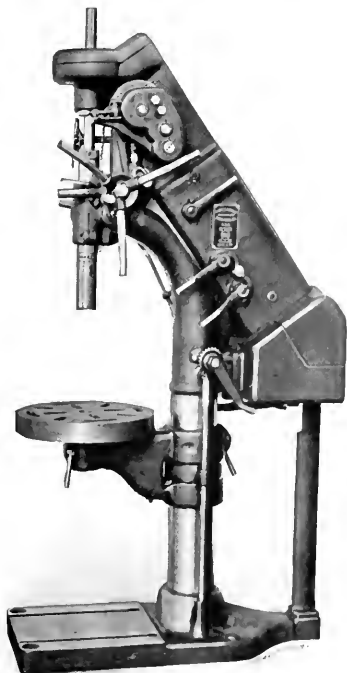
Barnes 20-inch All-g geared Drilling and Tapping Machine
